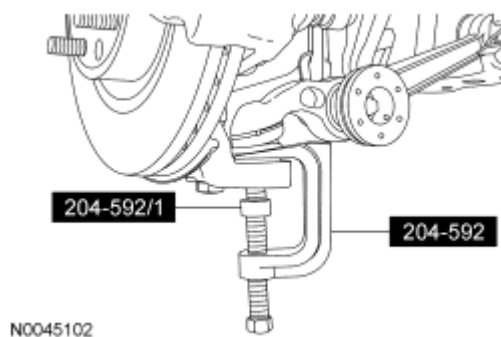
Identifying Special Tool 204-592/1 And 204-592
